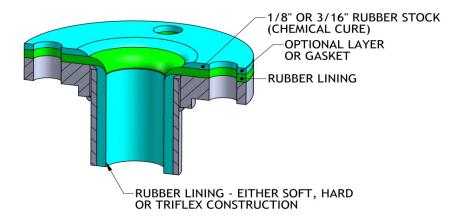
Internal steam cure vessel - Flange detail for outlets
